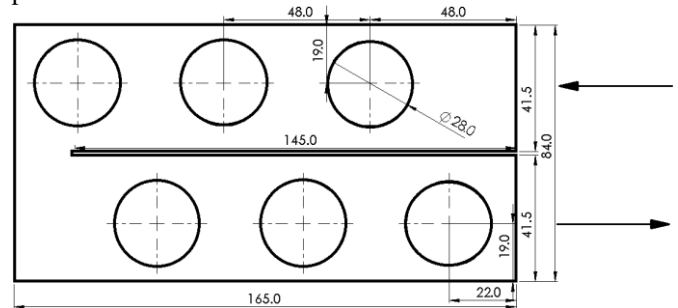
Cross-section of the Condenser part of the Heat Exchanger (all dimensions in mm)
